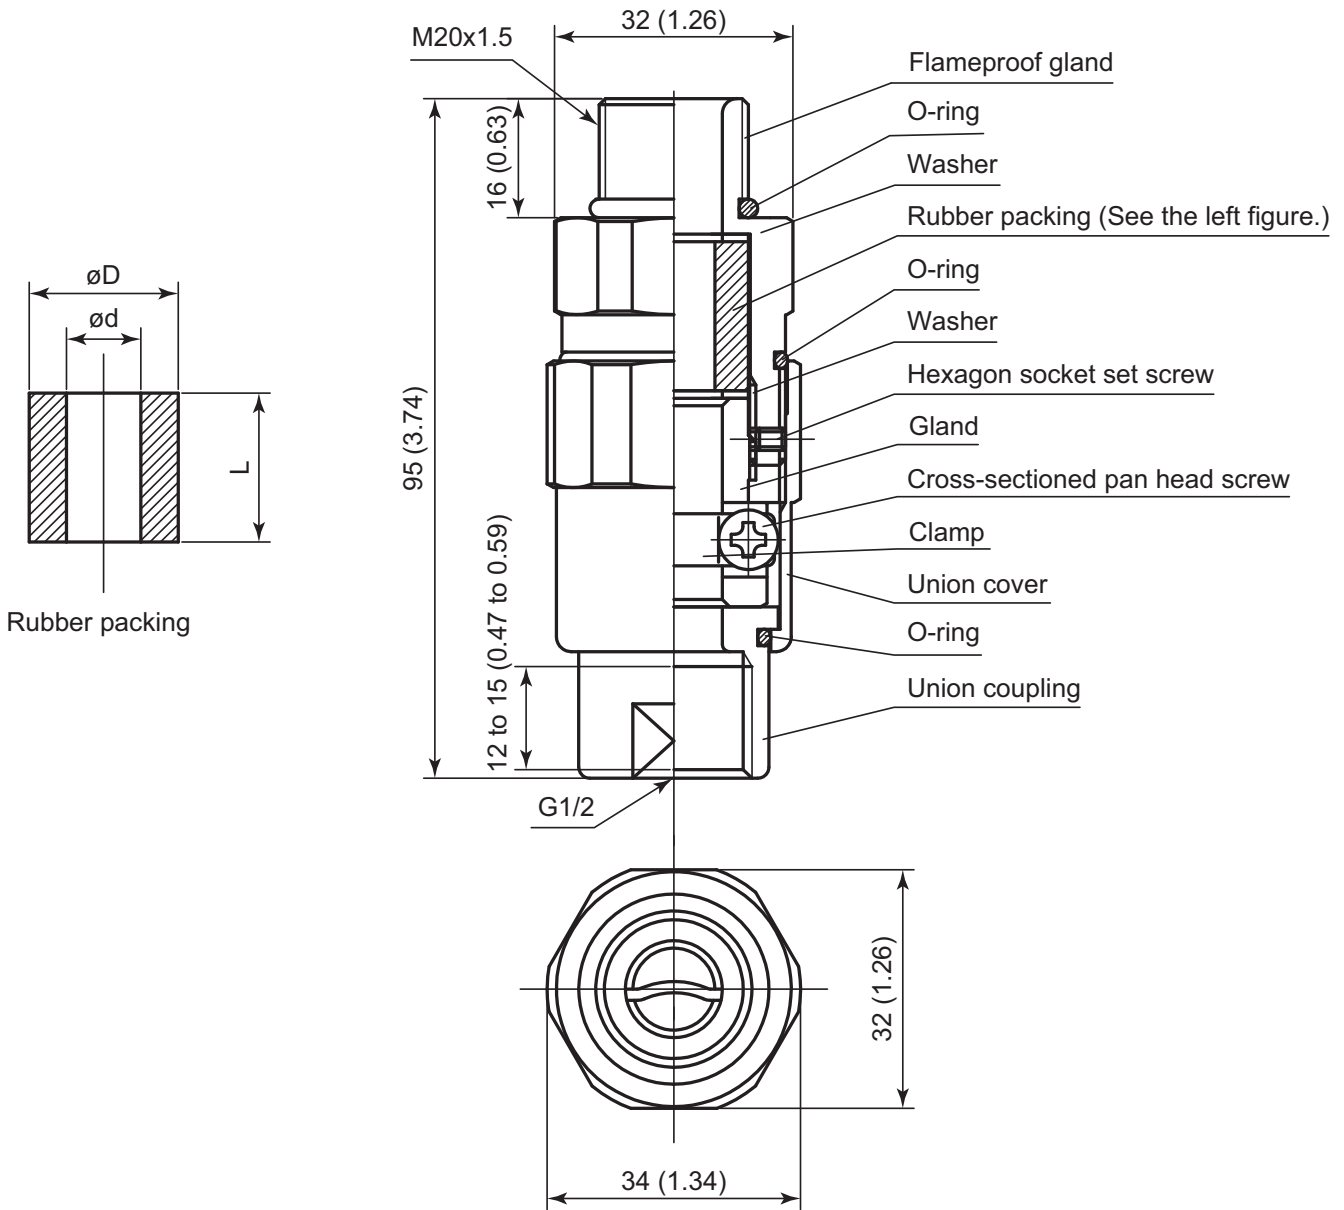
Dimensions of cable gland (option V5_), in mm (inch)
